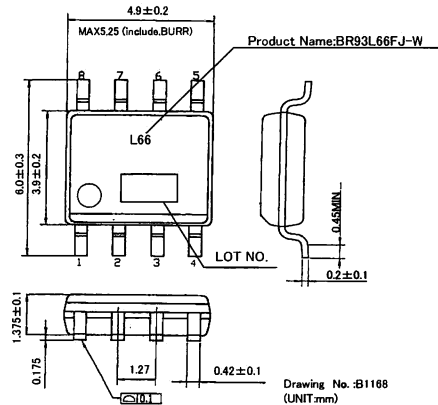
(e) PHYSICAL DIMENSION SOP-J8 (BR93L66FJ-W)
